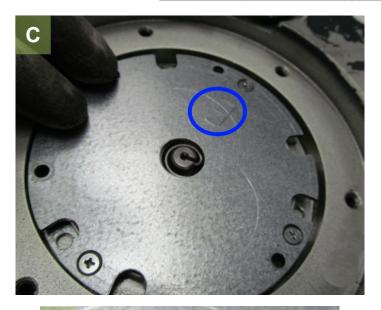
Verify Spring Orientation and Install Spring Assembly
